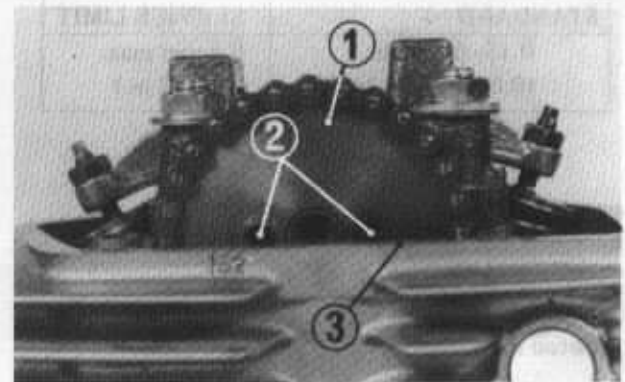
(1) Cam sprocket (2) Bolt holes (3) Gasket face of cylinder head
